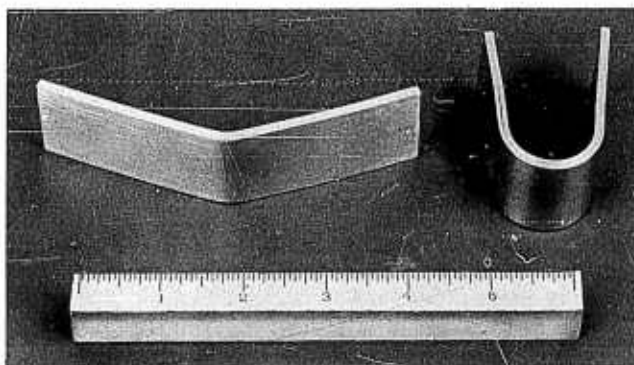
Guided bend specimens in explosively welded aluminum alloy 2024
